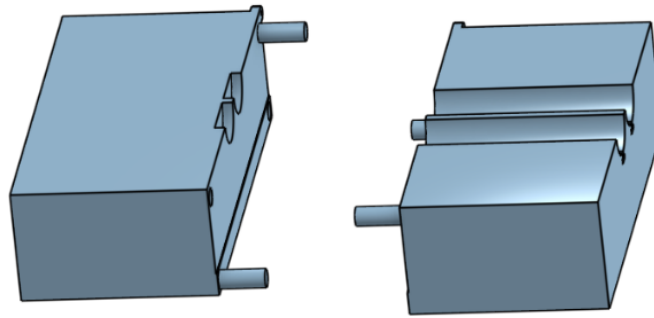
Paper Cutter Design Base Assembly [Gianna Inga]
